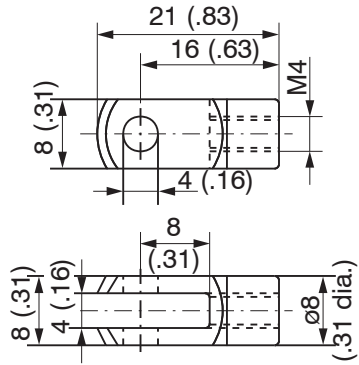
Fork head with folding spring bolt GK1-WDS, dimensions in mm (inches)
